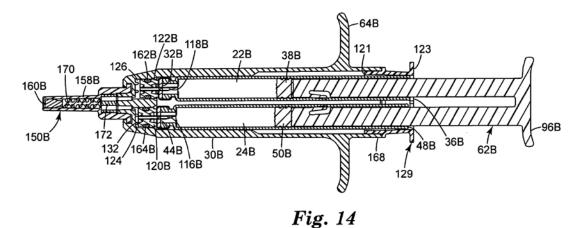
shows a perspective exploded view of elements of dispenser kit 20B, and Figure 14 shows a cross-sectional front view of the assembled dispenser. *Id.* at 6:7–10. Dispenser kit 20B includes carpules 22B, 24B, manifold 30B, dual nozzle 78B, and dispenser tip 150B. *Id.* at 11:9–12:44, Figs. 13, 14. Dodge describes that dispenser tip 150B houses a static mixer 170 and contains an opening 160B. *Id.* at 12:47–48, 51–52. As shown in Figures 13 and 14, a portion of dispenser tip 150B defines a chamber configured to receive the distal end of nozzle 78B. Another portion of dispenser tip 150B downstream of nozzle 78B defines a chamber configured to receive static mixer 170. And a portion of dispenser tip 150B downstream of static mixer 170 defines a chamber through which the adhesive components travel after passing through static mixer 170.
